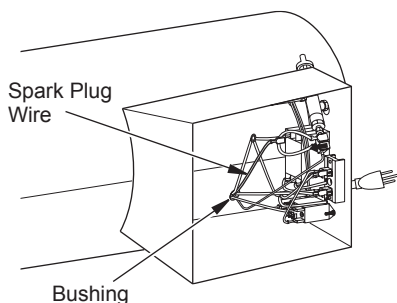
Removing Spark Plug Wire from Spark Transformer (Heater may vary from illustration)
